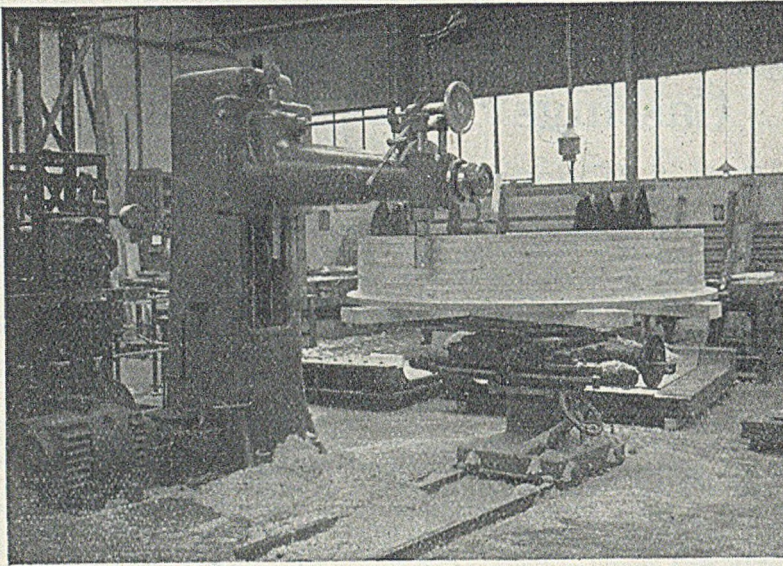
WADKIN MILLER WITH 7 FT. 6 IN. DIA. BY 18 IN. RING ON THE TABLE.
